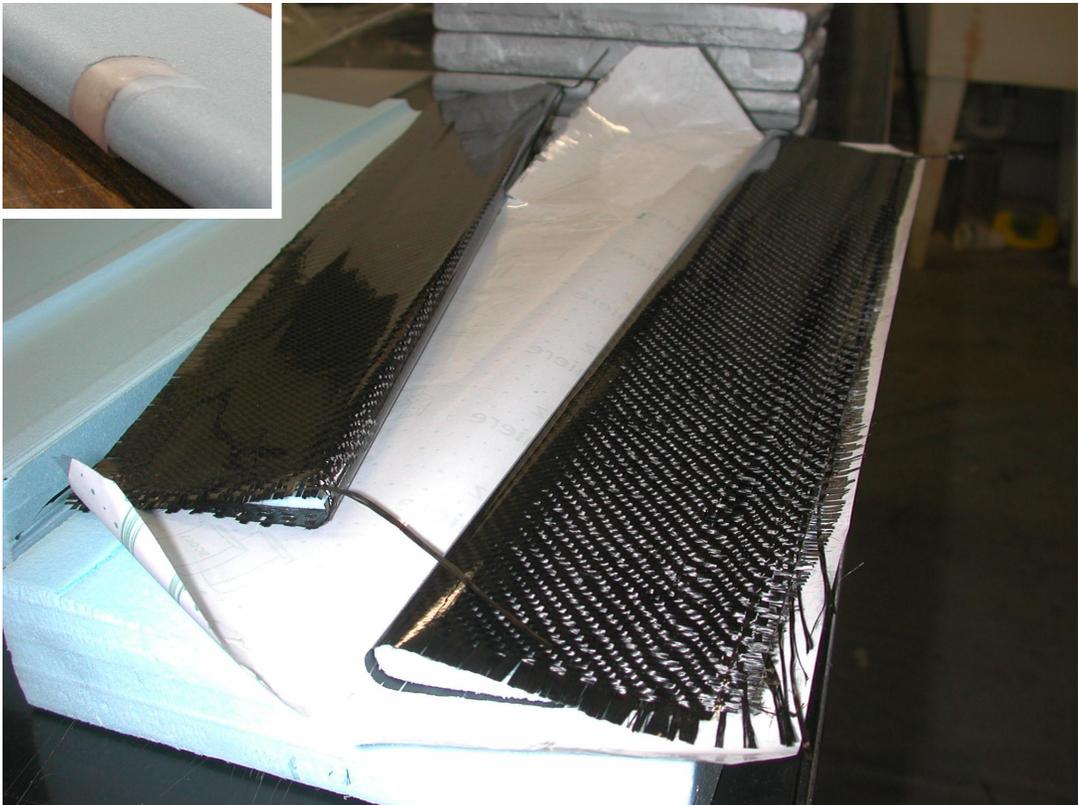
Untrimmed Elevator Wrapped in Carbon – detail view top left.
